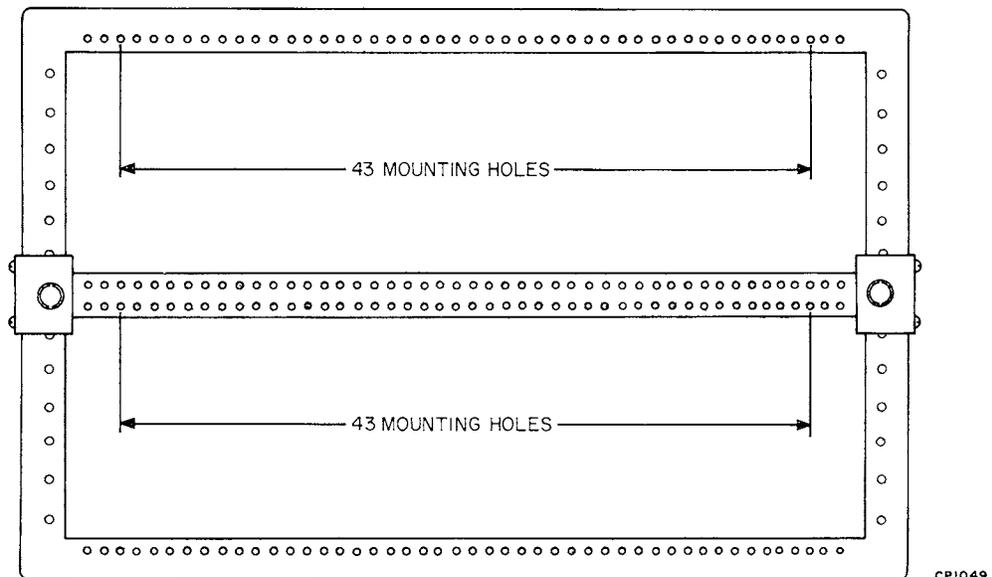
S-C 16C Apparatus Mounting Cabinet, Mounting Hole Arrangement.
